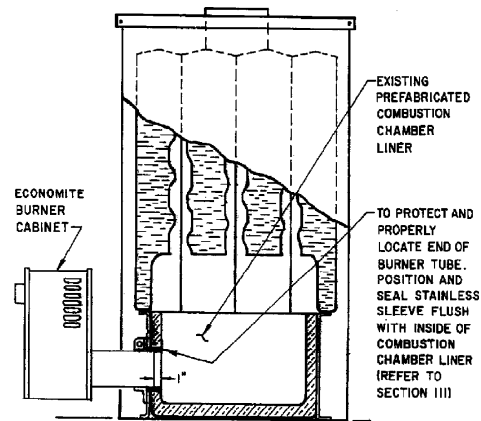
Dry Base Boiler with Combustion Chamber Liner (Furnace Construction is Similar)
